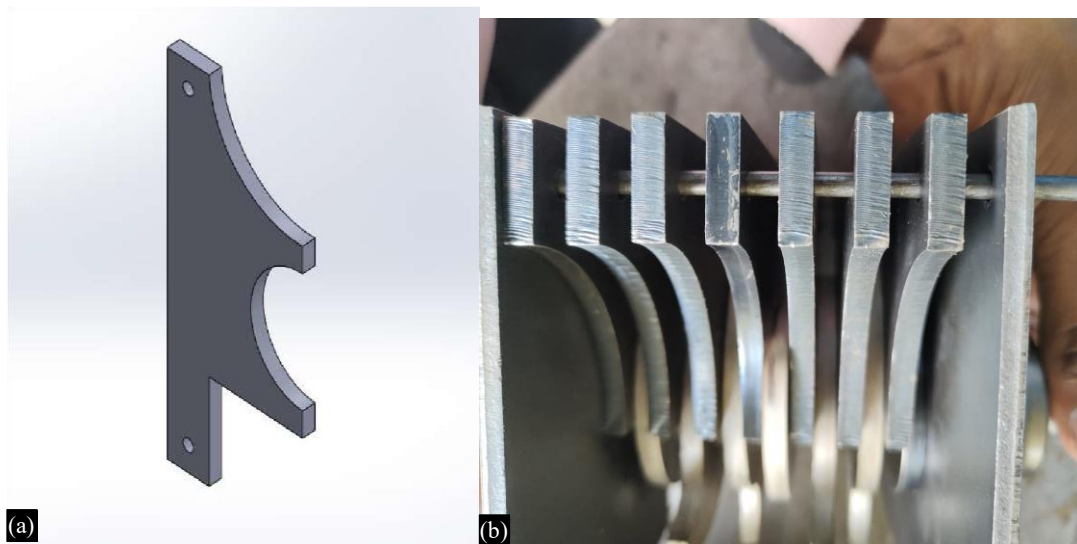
(a) Design of fixed blade; (b) Fabricated fixed blade
